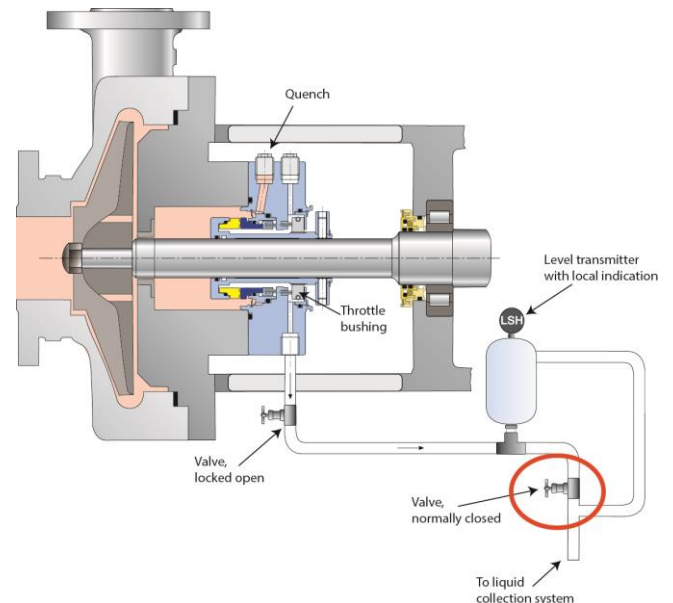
Plan 65B (Source: AESSEAL plc, Rotherham, UK)
